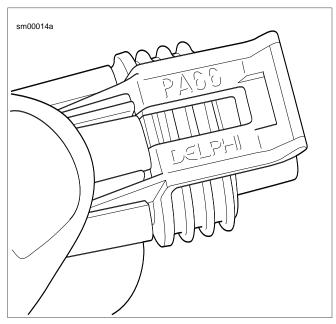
Delphi GT 150 Sealed Connector: Socket Housing Latch
